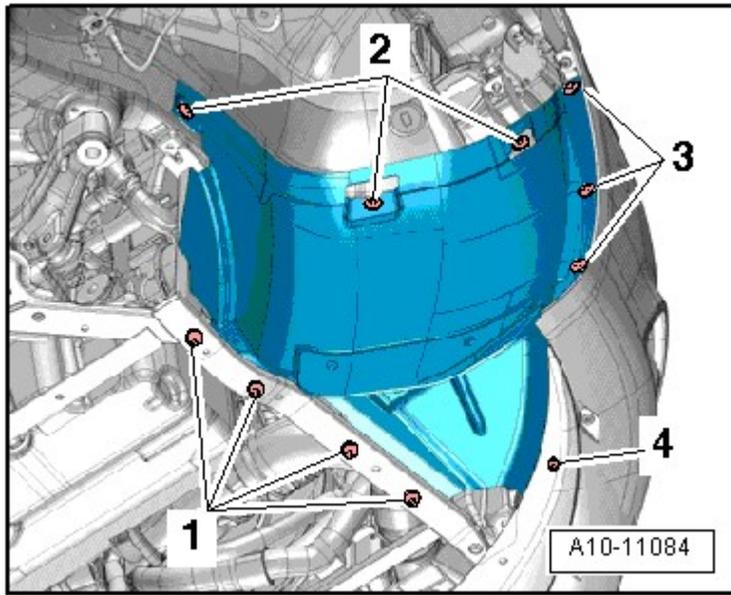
Front Section Of The Right Front Wheel Housing Liner
